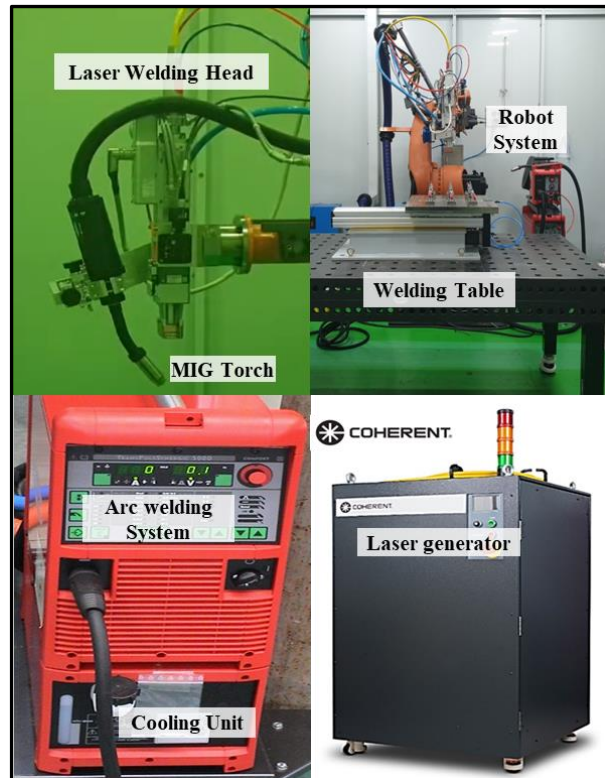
ARM laser-arc hybrid welding experimental equipment.
